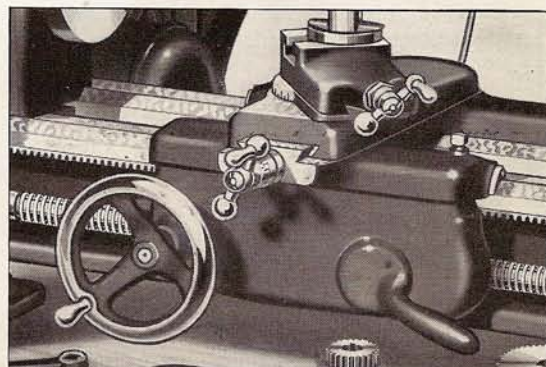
Plain Geared Screw Feed Apron Supplied on All Model C 9-inch "Workshop" Lathes
